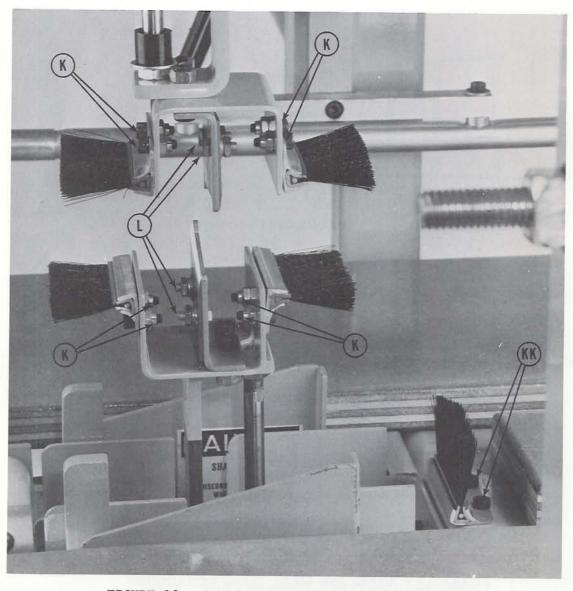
CUT AND BUFF HEADS -RIGHT SIDE VIEW
